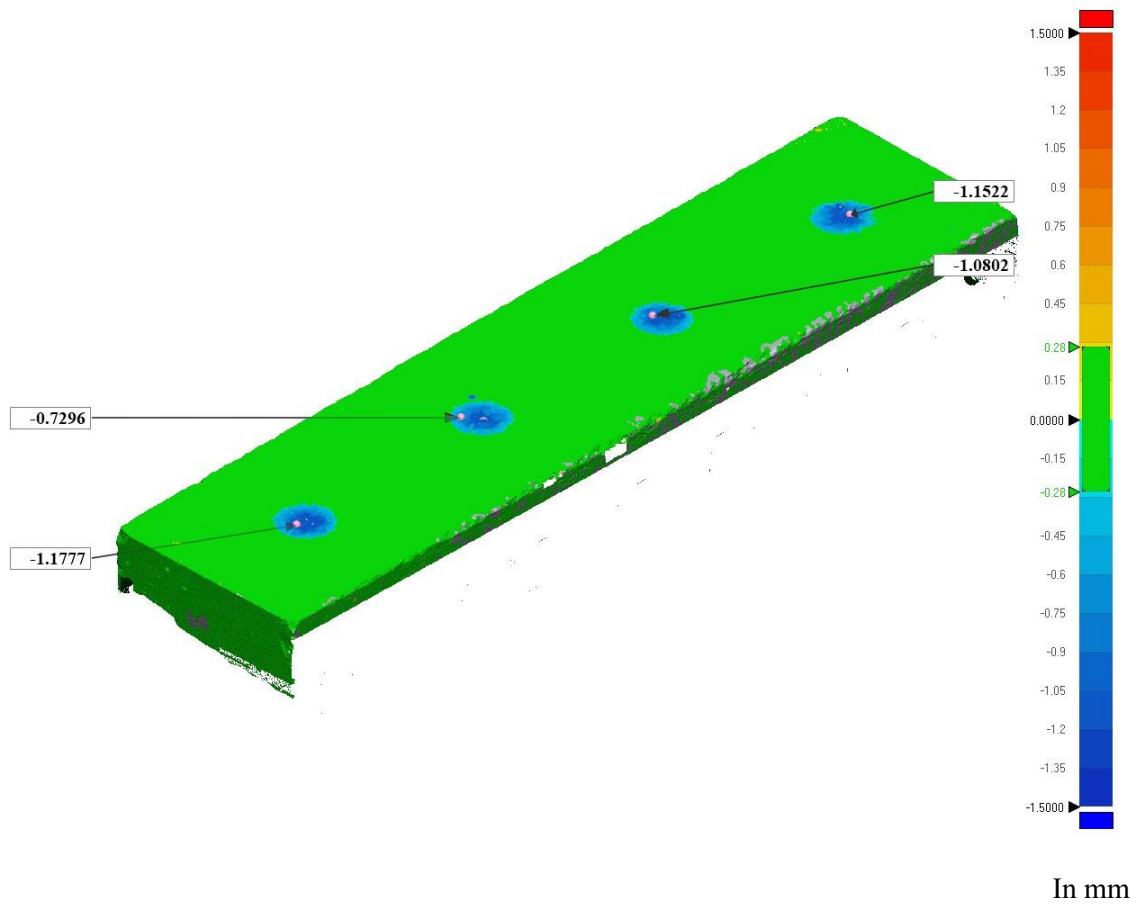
Typical laser scanning of a sample tested using sandblasting approach.
